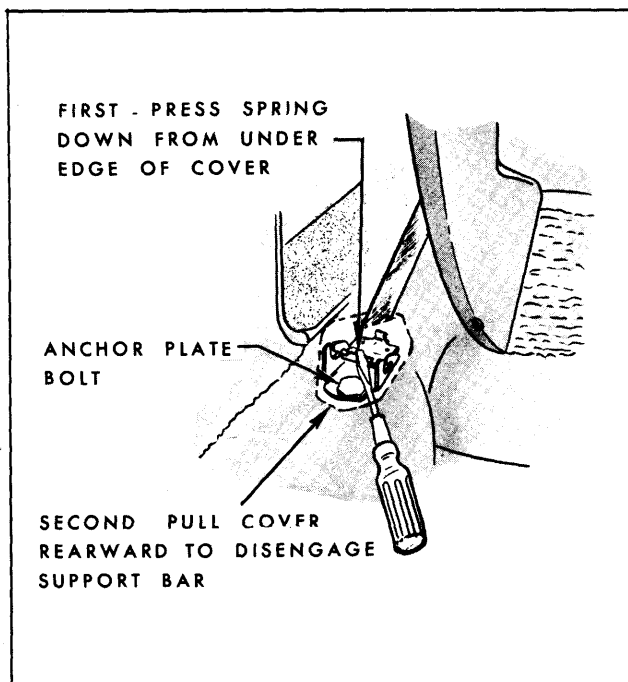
Front Seat Belt Self-Locking Retractor - Removal
